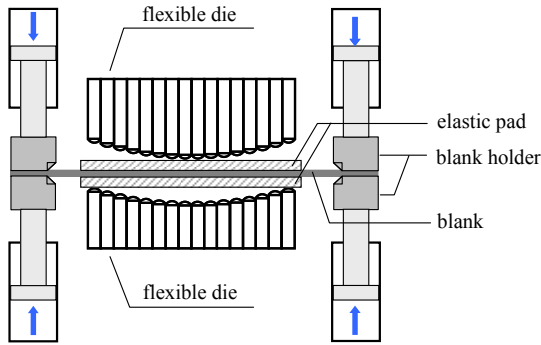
Schematic diagram of flexible forming process for sheet metal using blank holder
